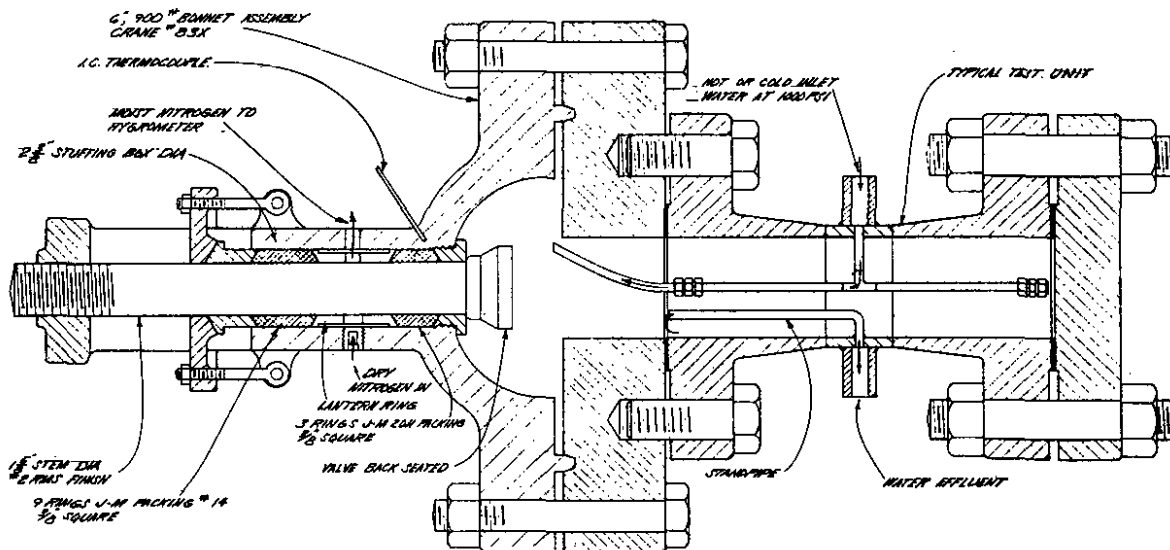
VALVE STEM LEAKAGE TEST: 6-INCH, 900-LB GATE VALVE
